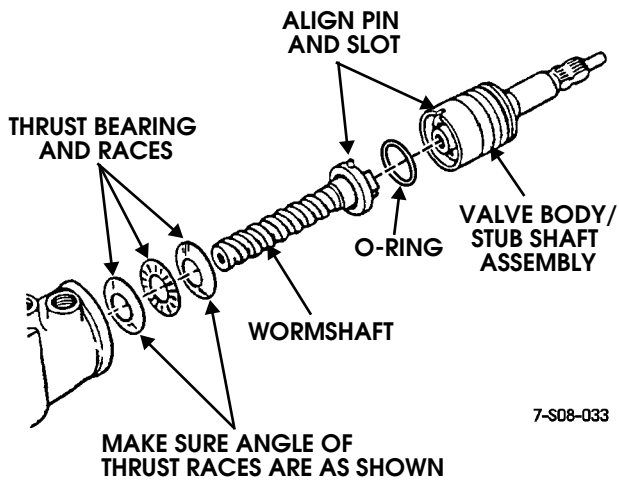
Wormshaft and Valve Body/Stub Shaft Assembly
